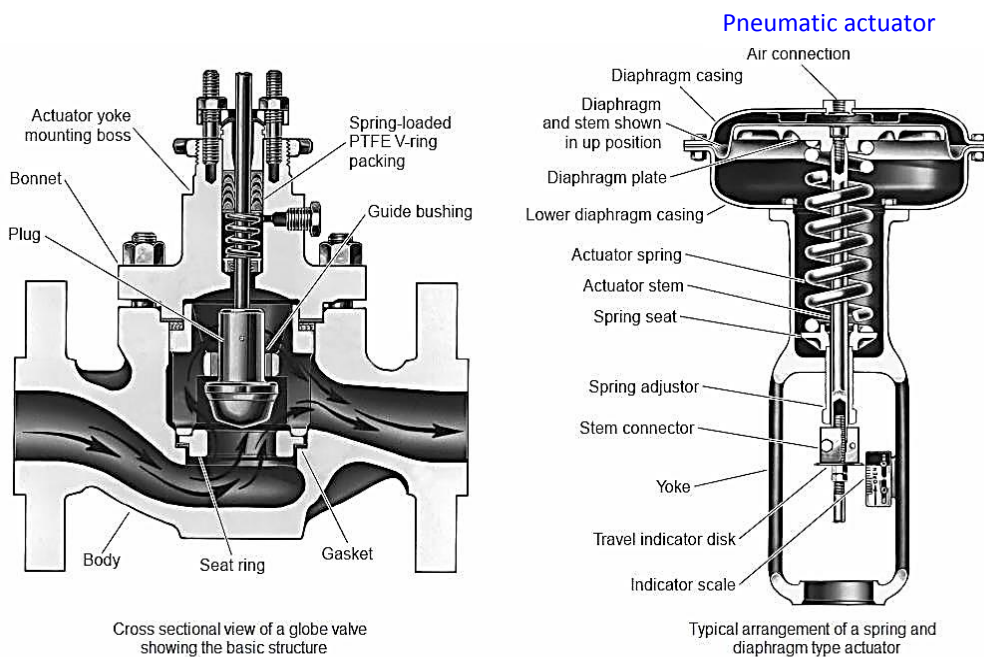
Cross-sectional views of a control valve and valve actuator
